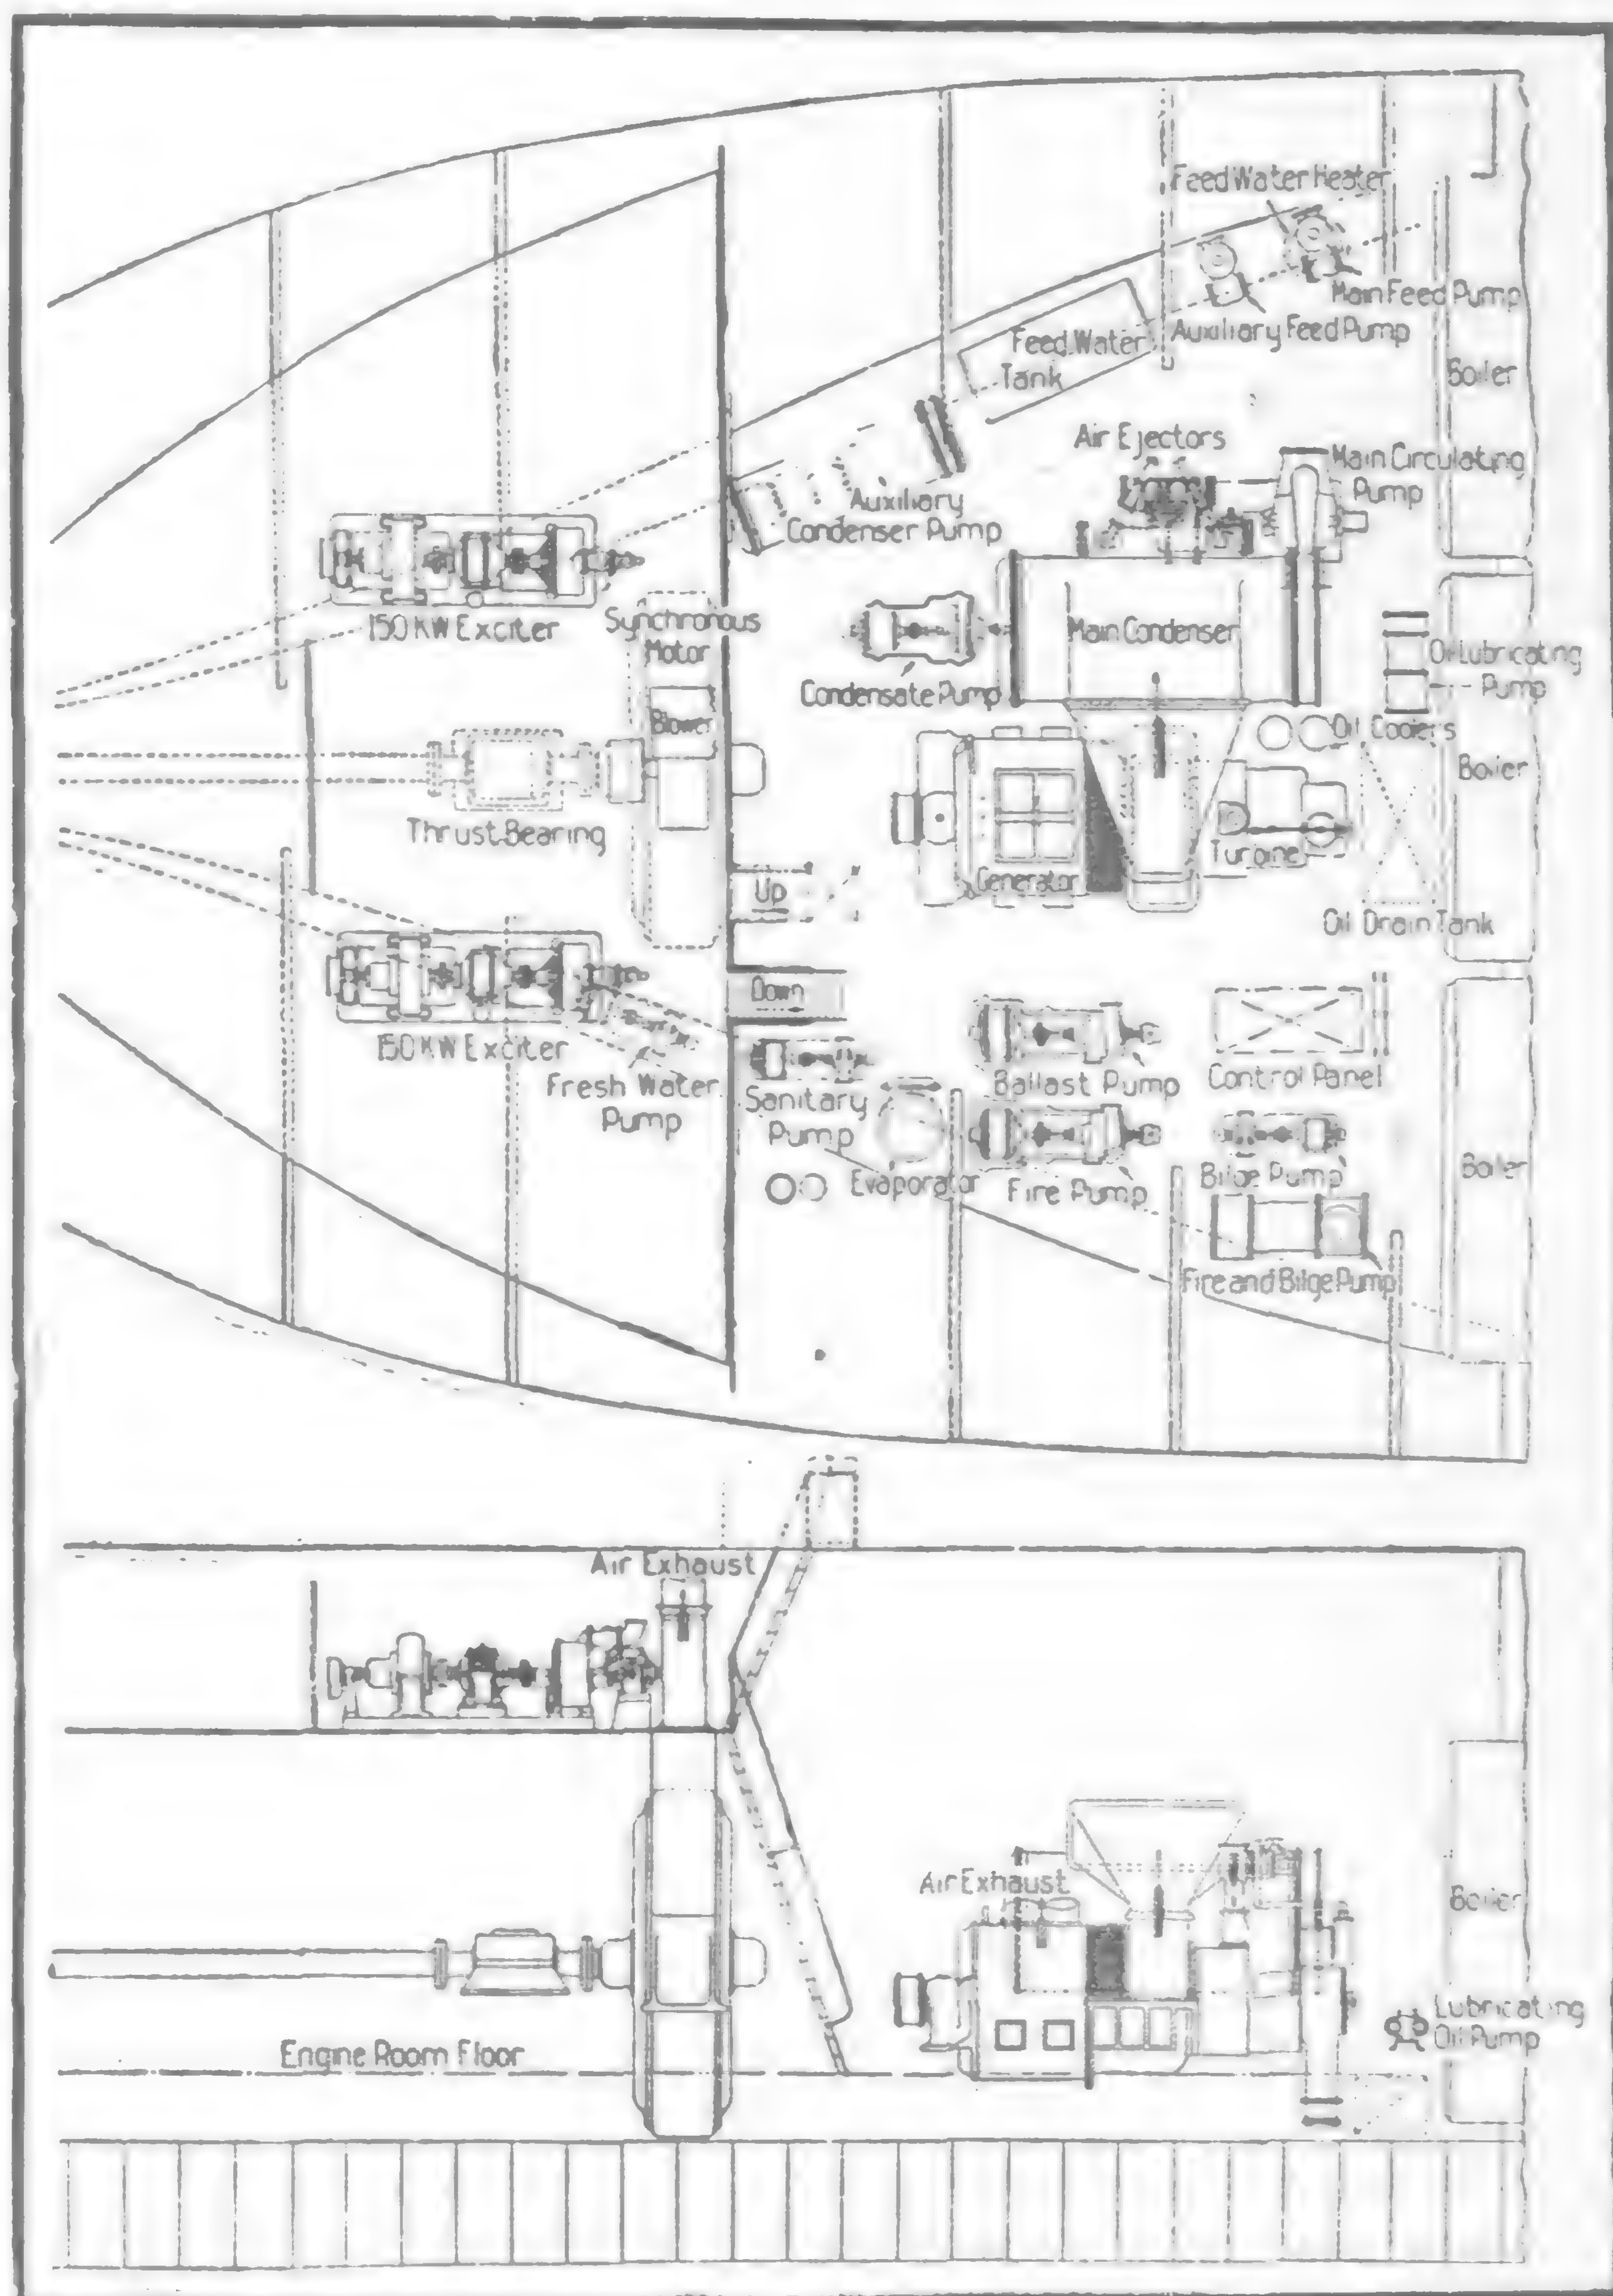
An Arrangement of Turbine-Electric Drive for Single Screw Vessel in which all Apparatus is Placed Aft
